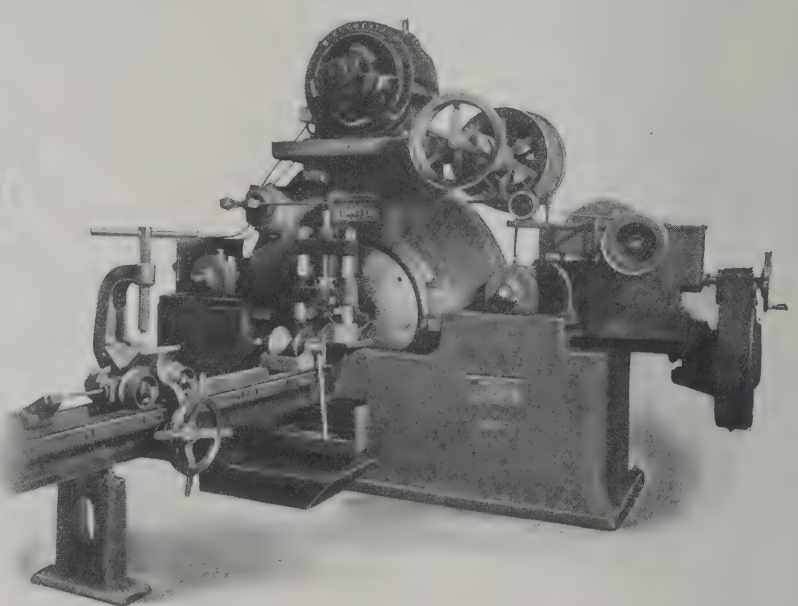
Heavy-duty Cutting-off Machine, built by the George Gorton Machine Co.
